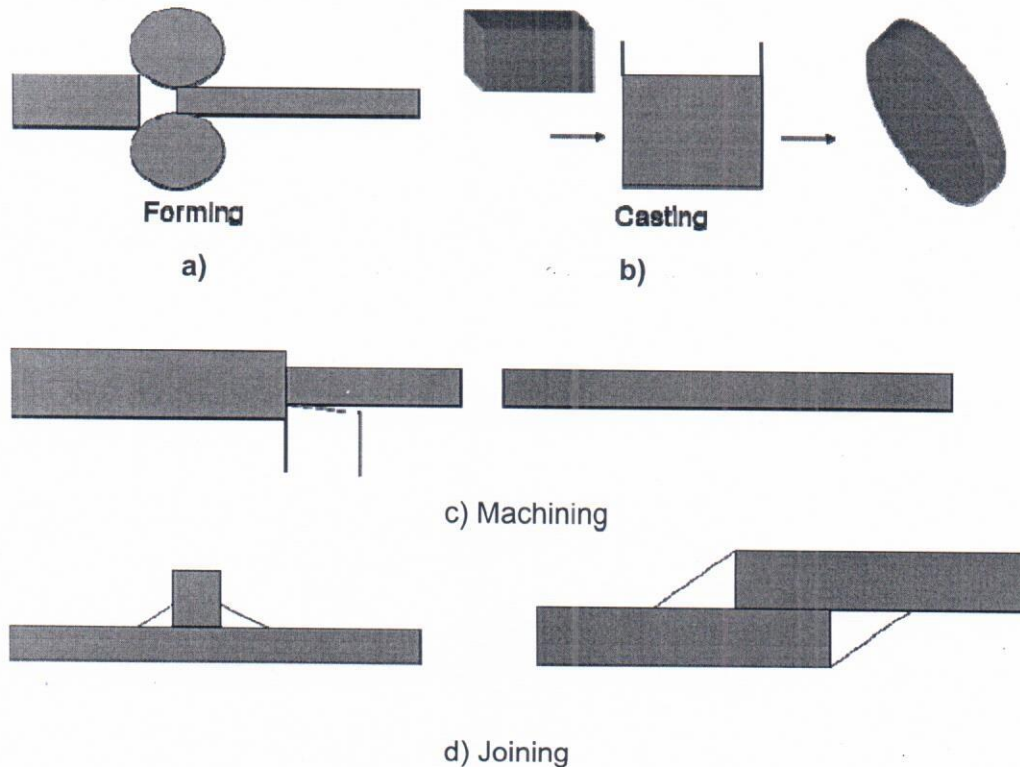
Schematic diagram showing shaping approaches using different manufacturing processes a) forming, b) casting, c) machining and d) joining
